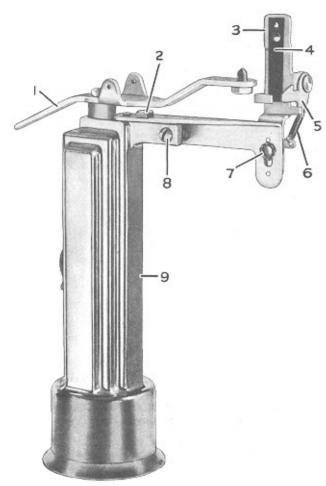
No. 11540-A Tone Arm Base Assembly (Side View)
